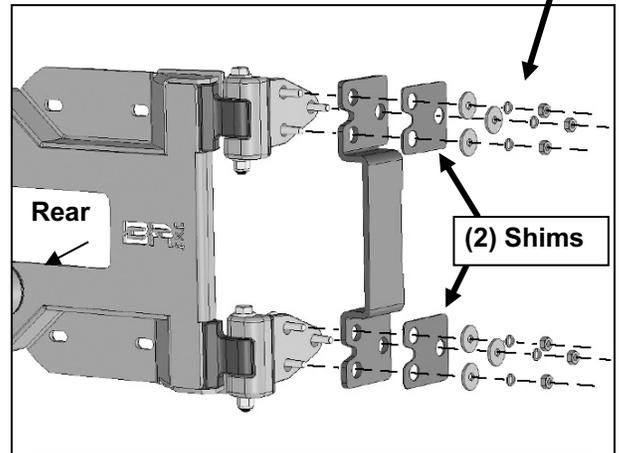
Inner Hinge Reinforcement Bracket in place over welded hex nuts
